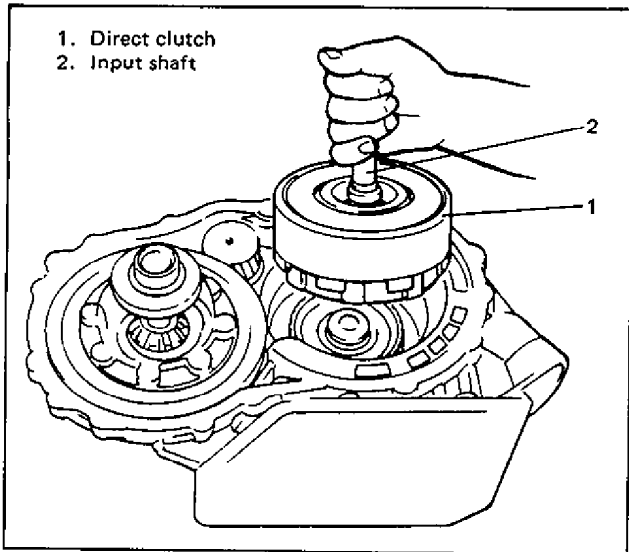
B-106 Removing Direct Clutch & Input Shaft
